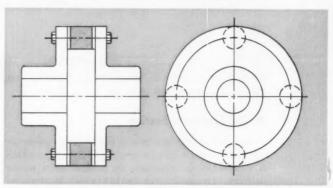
Shear-type coupling with multiple elastomer shear sandwiches attached to parallel face flanges.
